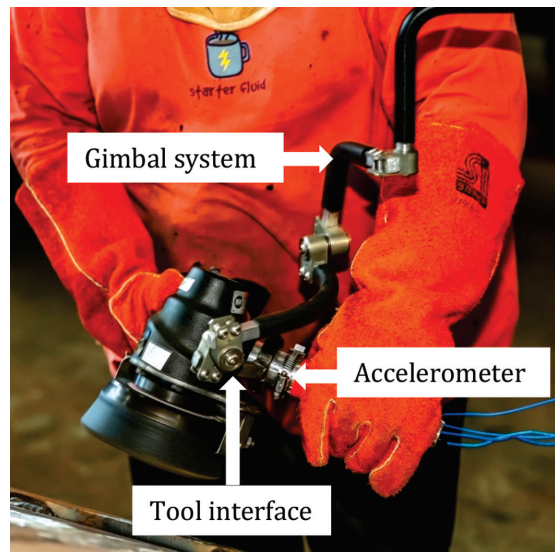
The mechanical arm's gimbal system was attached to the collar of the instrumented handle near the body of the grinder via the tool interface. An accelerometer can be seen mounted on the handle with a mounting block and hose clamp between the tool interface and the thenar region of the tool operator's gloved hand. A second accelerometer (obscured in the photo) was similarly attached to the right tool handle for simultaneous acceleration data collection (see Fig. 1).
